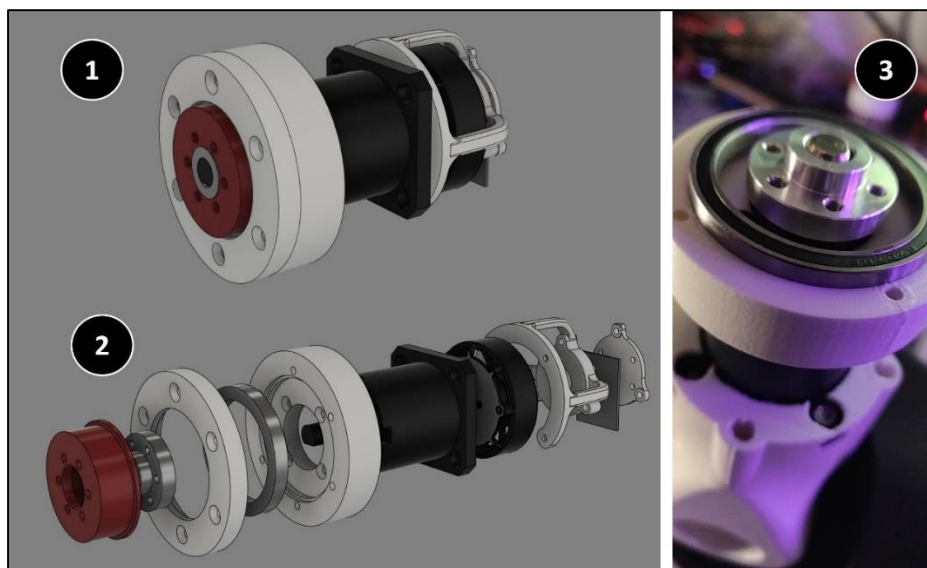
Design of the actuator (1) and of the exploding parts (2) and prototype (3). On panel (2) from the left to the right, the Output shaft, Aluminium Mounting hub, Output housing front, 61707-2RS Dunlop Sealed Thin Section Ball Bearing, Output housing rear.
